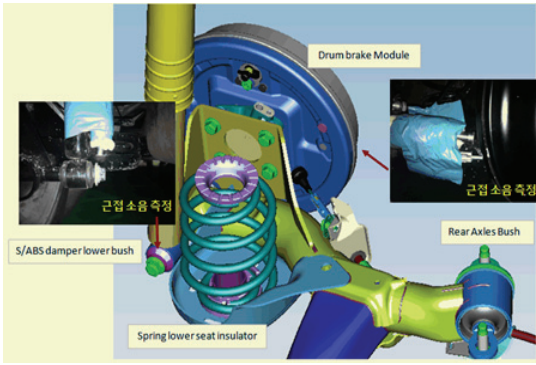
Accelerometer installation position in test vehicle(shock absorber lower bush, spring lower seat insulator, drum brake assy)
